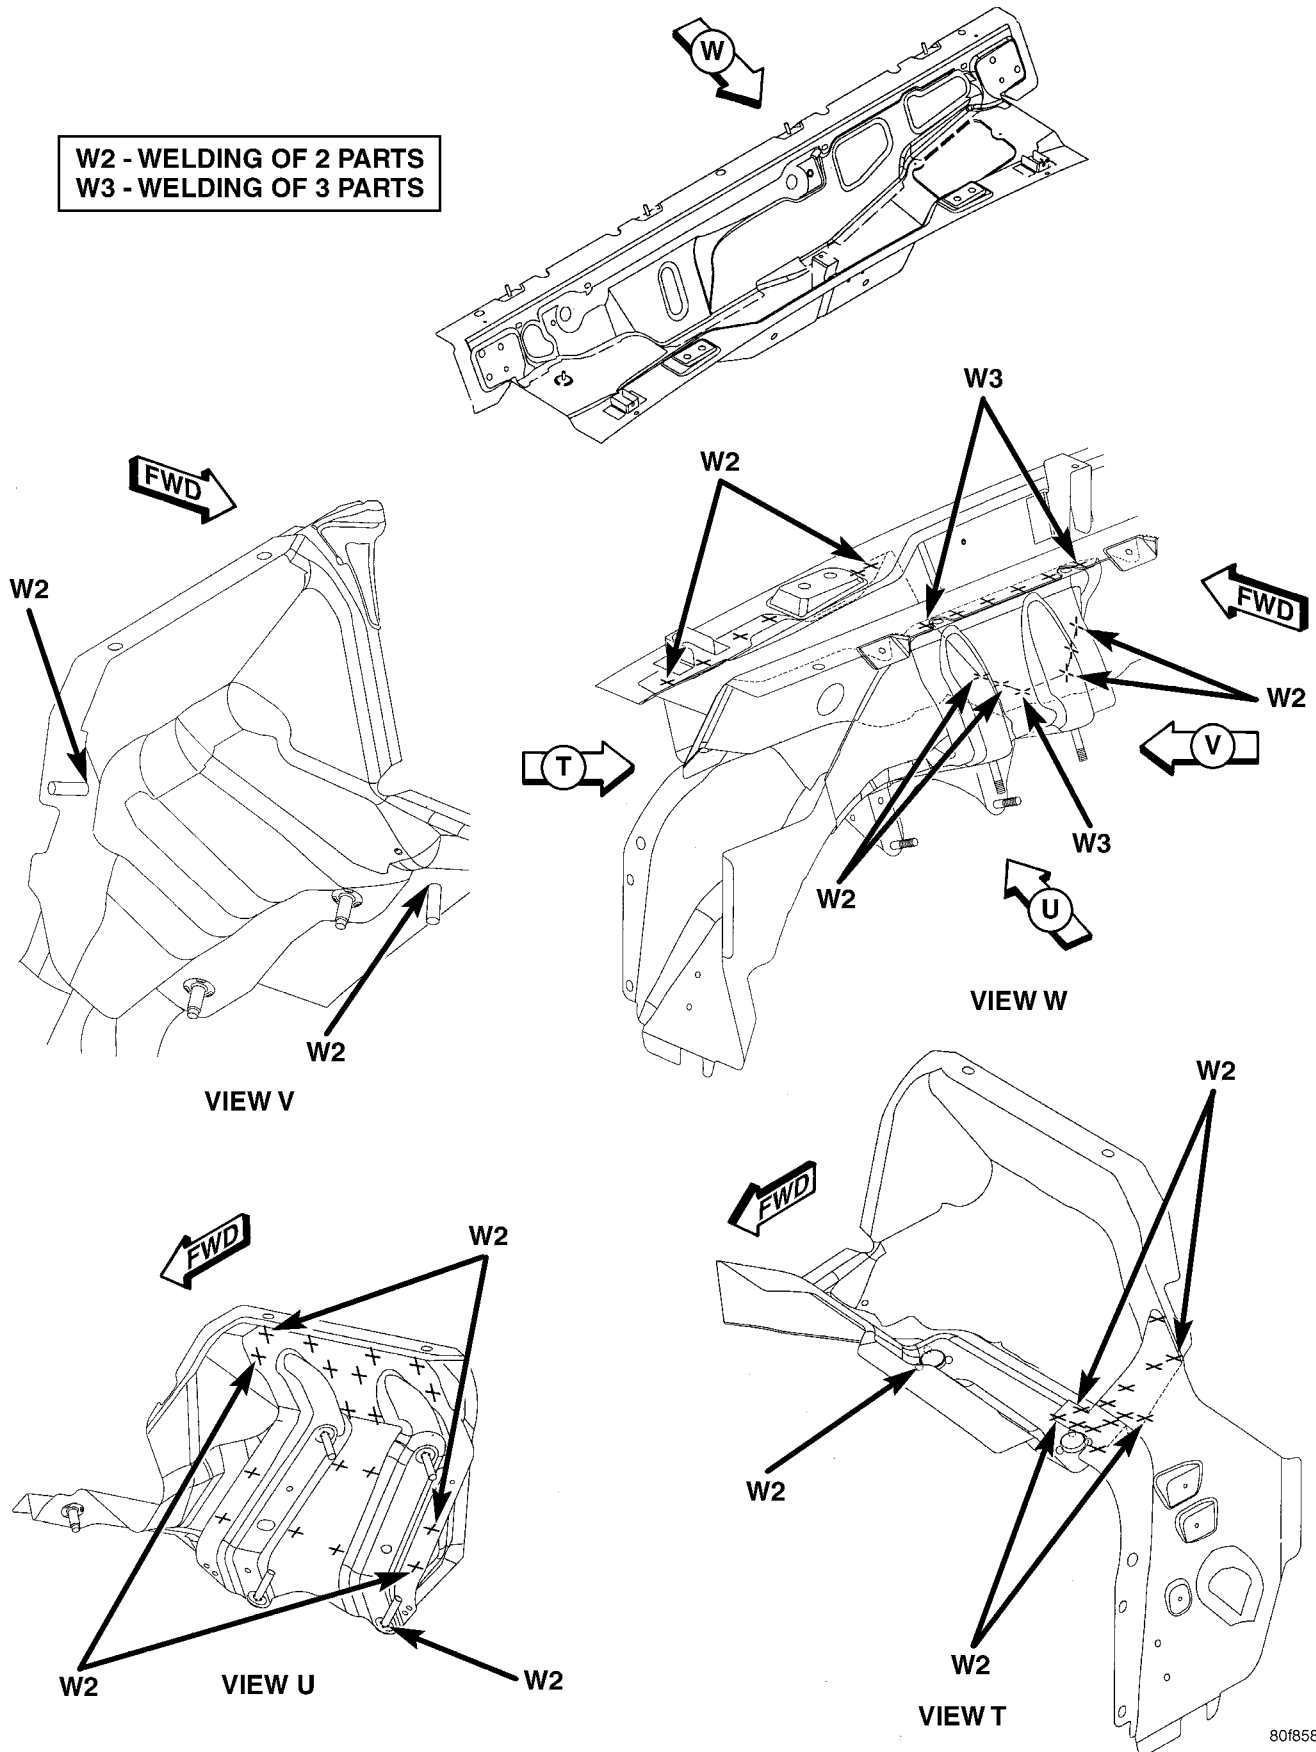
COWL ASSEMBLY - LEFT HAND DRIVE (3 OF 3)
